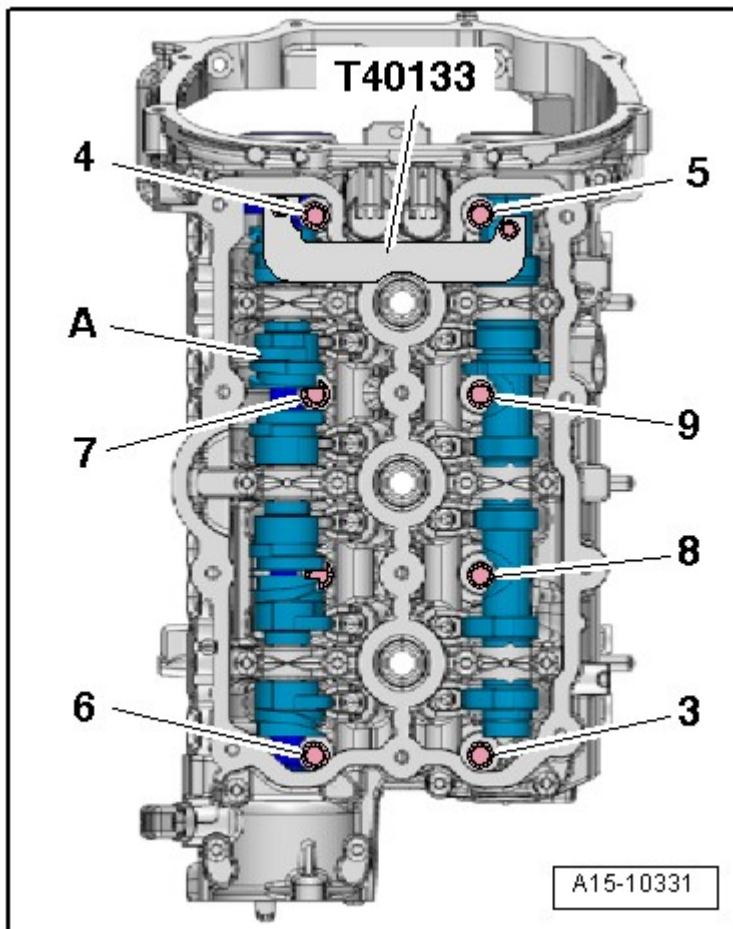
Identifying Bolts -3 Through 9- And Unloaded Camshaft Slider -A-
